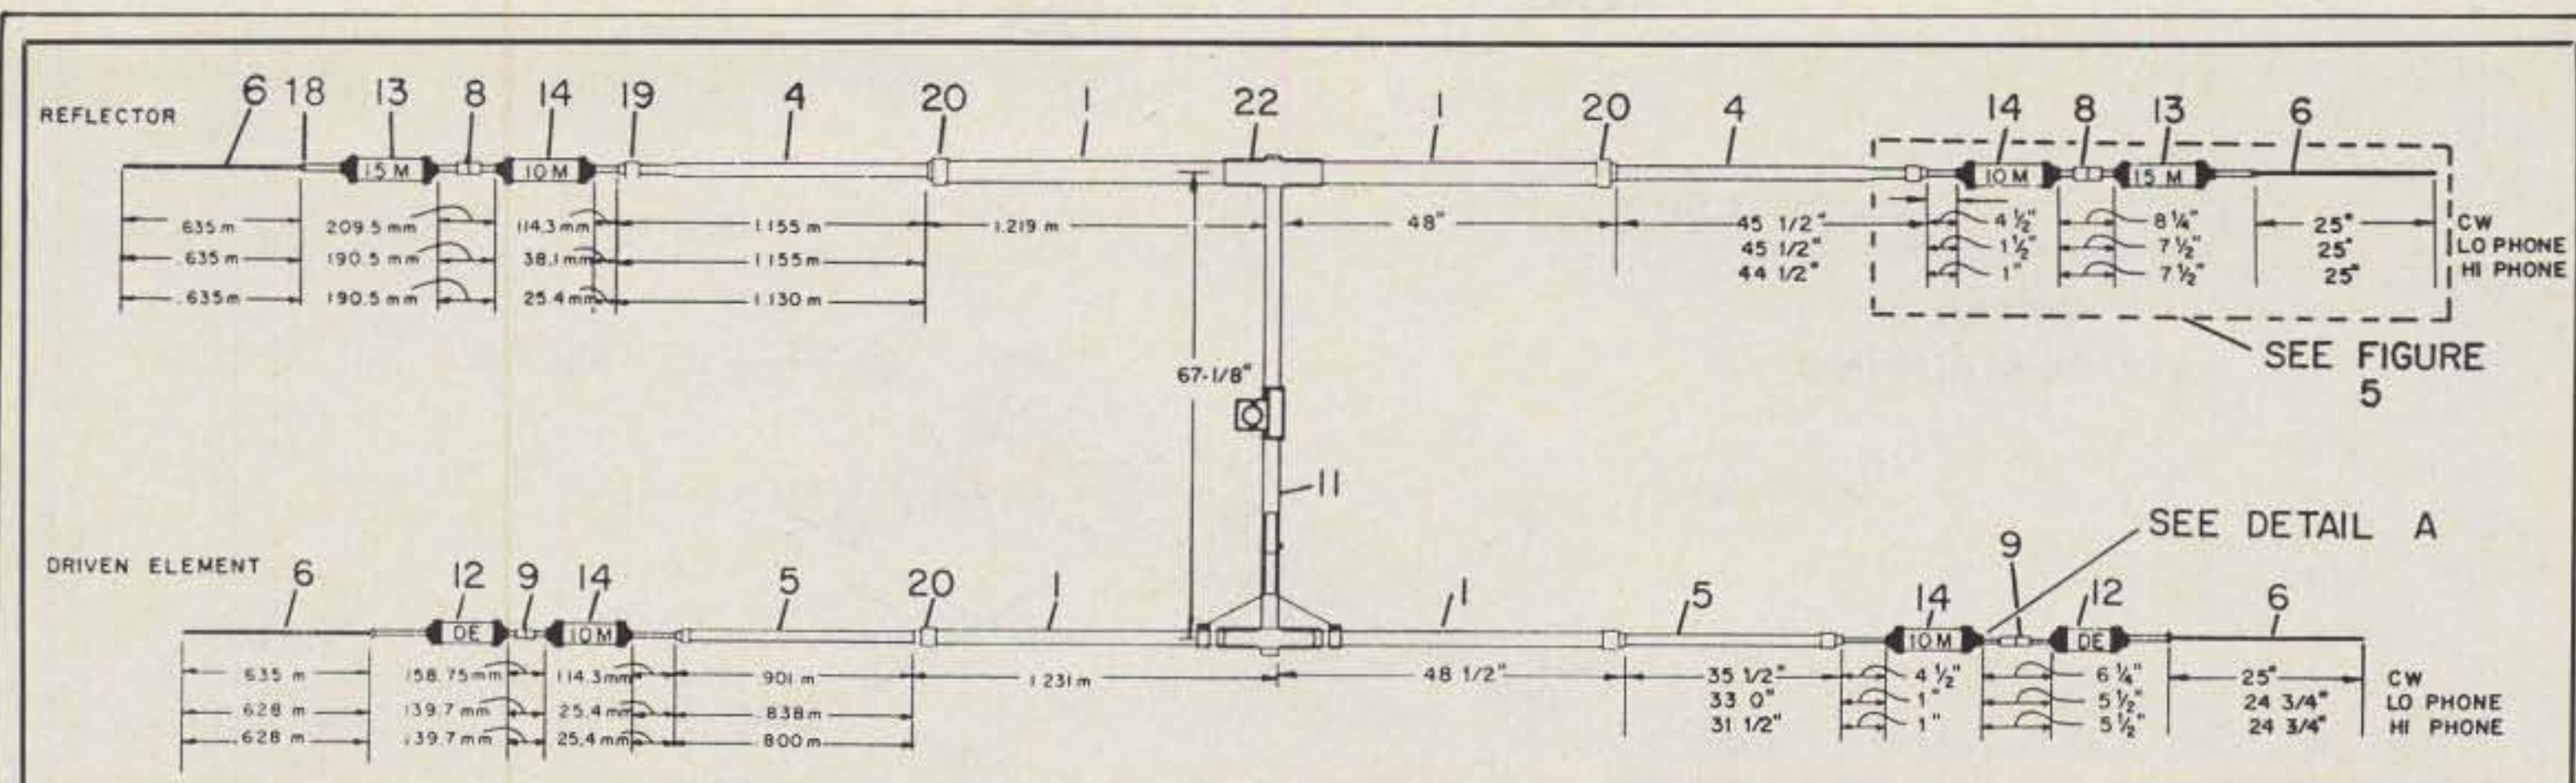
Detailed dimensions for the TH2 (one side is in metric units and the other side is in English units). All the numbers above the parts refer to a parts list which is not shown.
